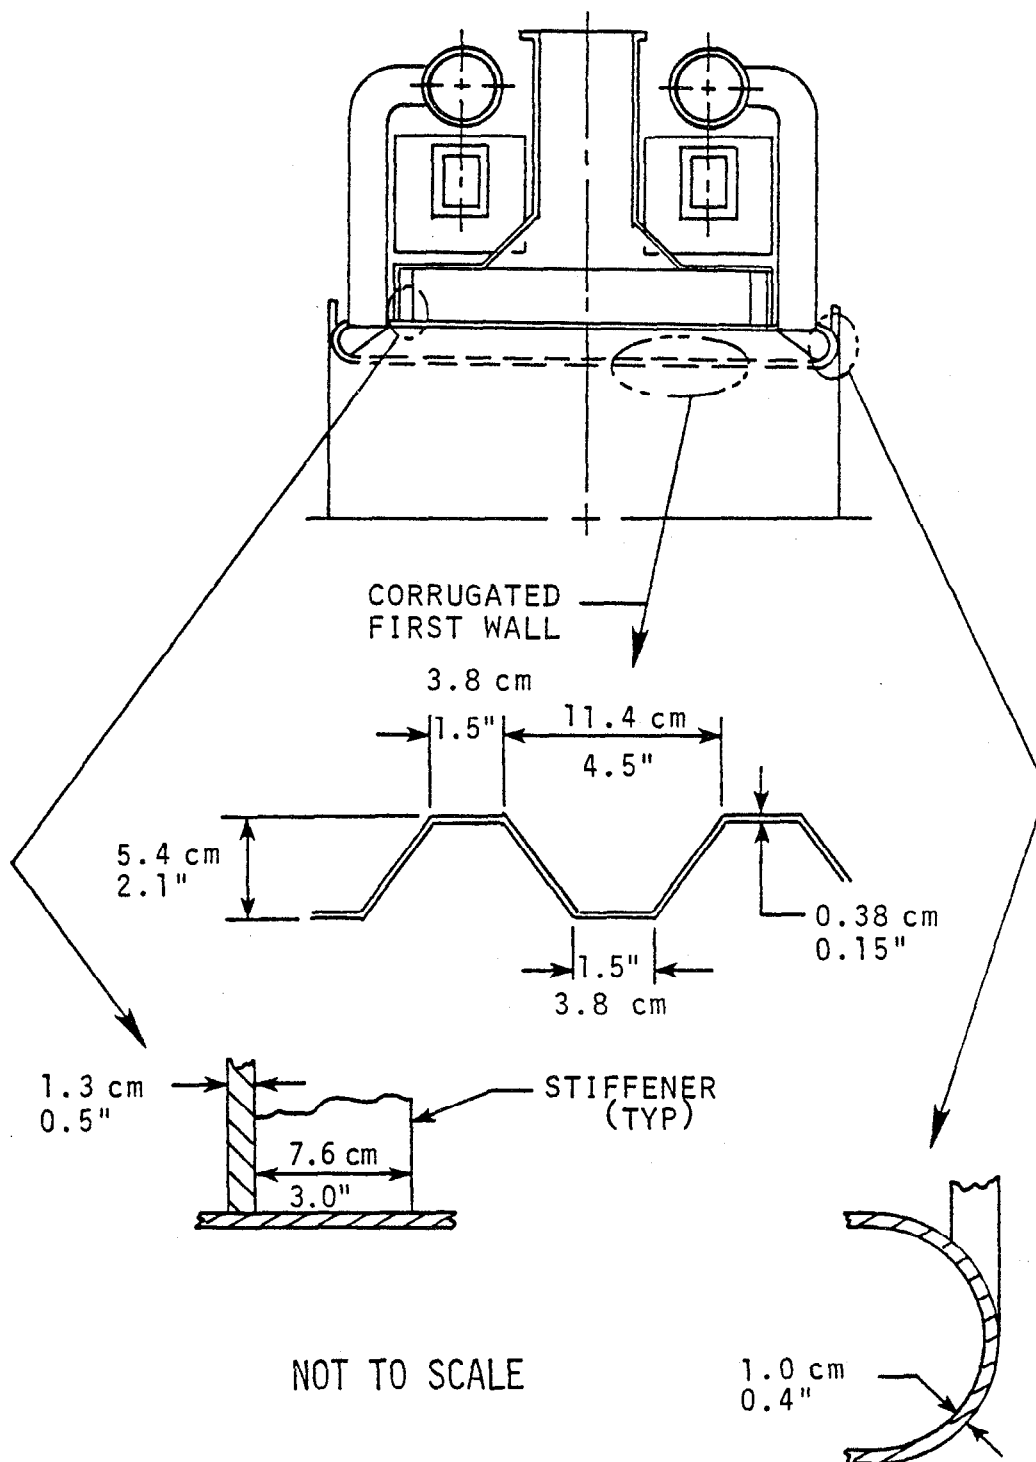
Structural dimensions for TMHR reference liquid metal cooled metal blanket module.
